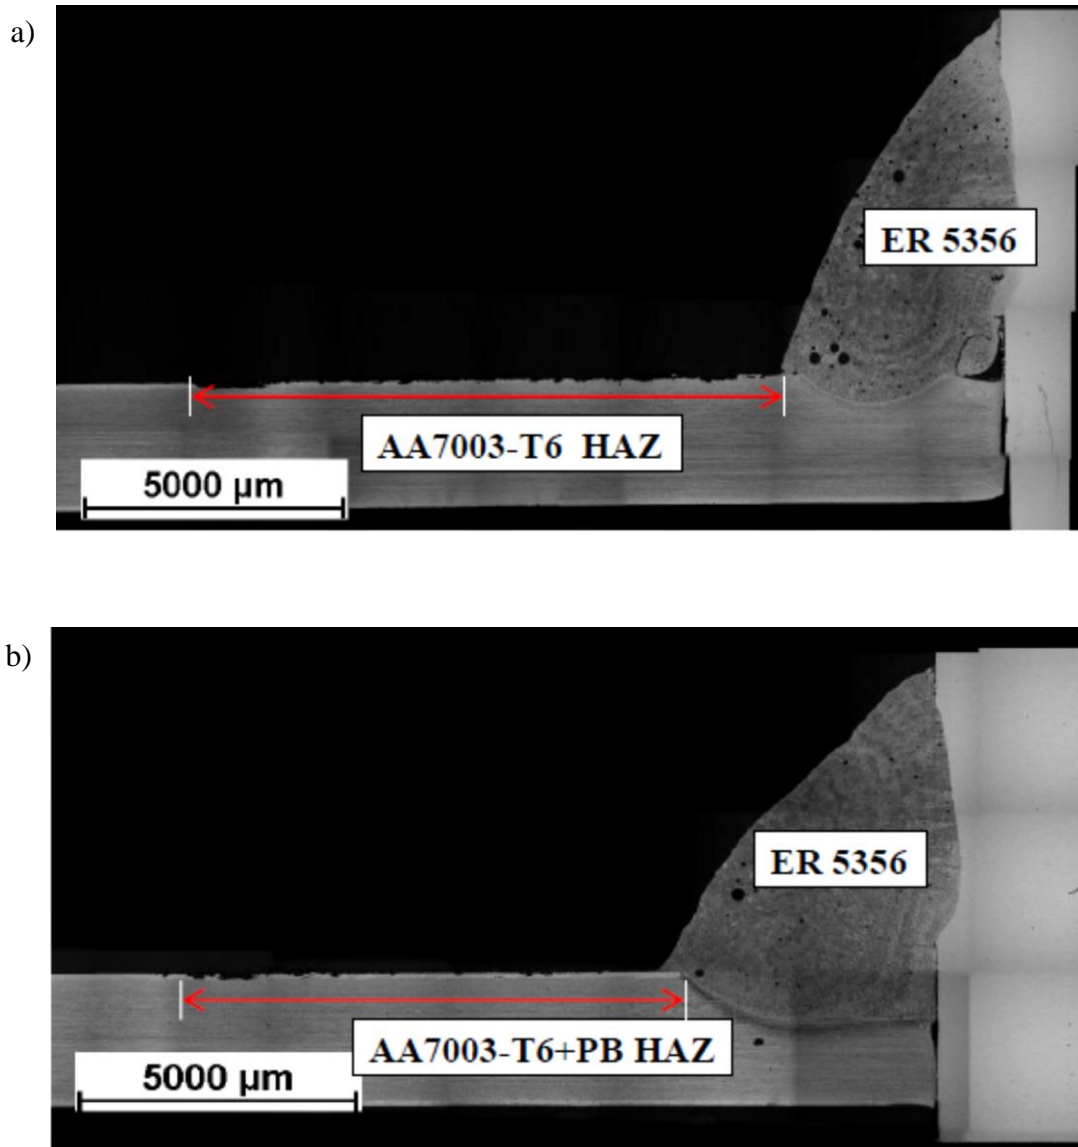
Large area scans of T-joint welded configuration E (ER5356/AA7003/L) in the (a) as-welded T6 condition and the (b) as-welded T6+PB condition post exposure to ASTM G85-A2.
